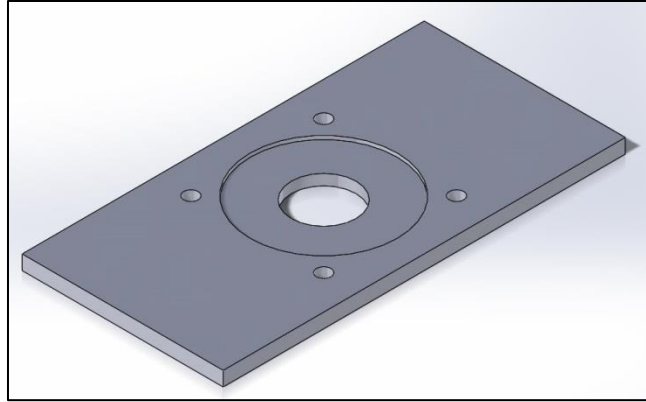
Drawing of the motor mounting plate, which secures the motor to the water channel.
